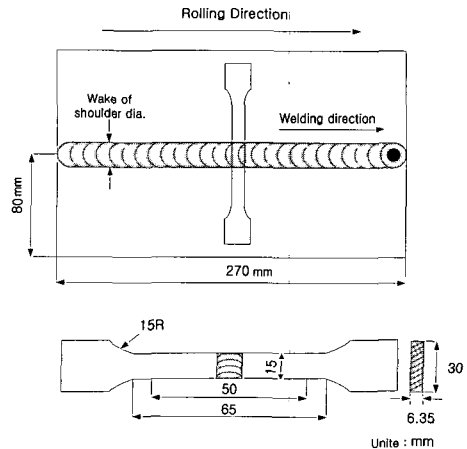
Schematic of F.S. Welding direction and tensile test specimens.
